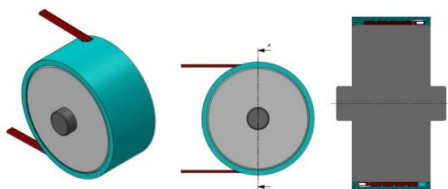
Design of Electric Motor Cooling Water Jacket with Flat Pipe Winding [3]
